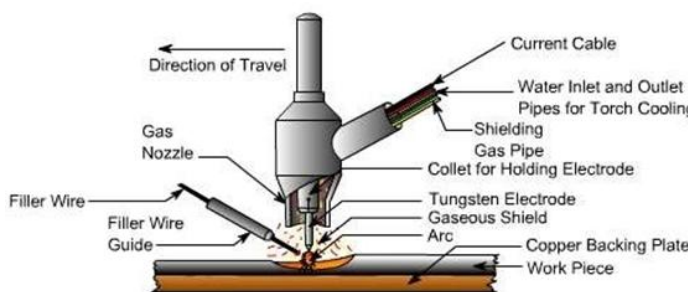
PRINCIPLE OF TIG WELDING (Reference 1)
